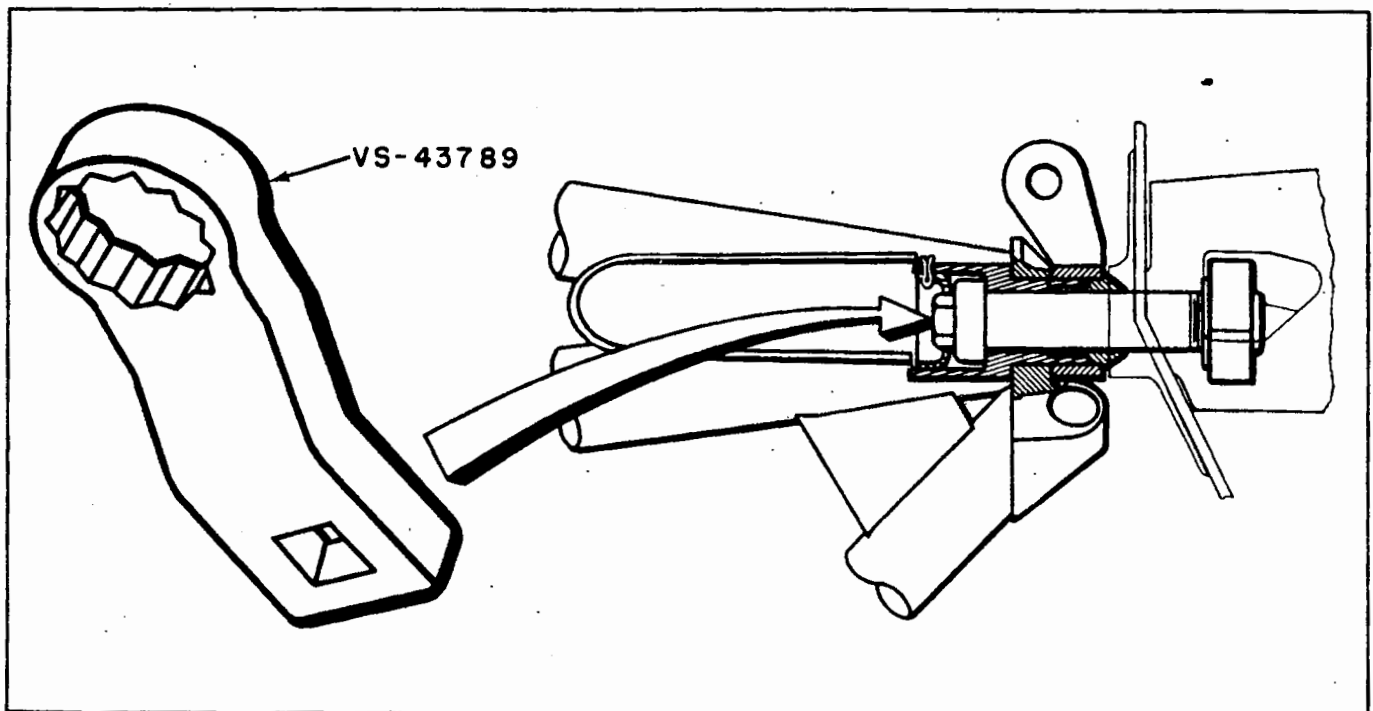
Wrench — Used for Tightening Engine Mount Bolts.
